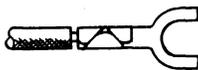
Patton-MacGuyer-type Terminals—Approved Only when Applied to Wire by Attaching Machine which Crimps and Solders at Once
